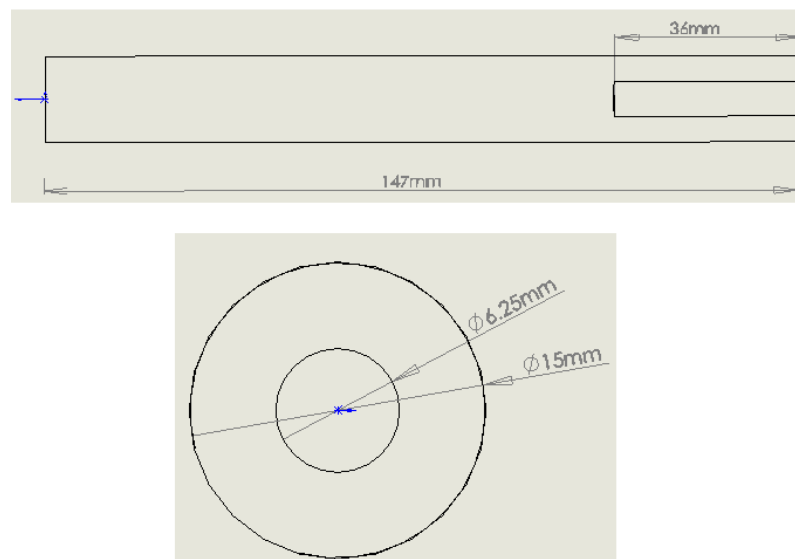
The Aluminium rod that the fluxgate sensor was inserted to.
